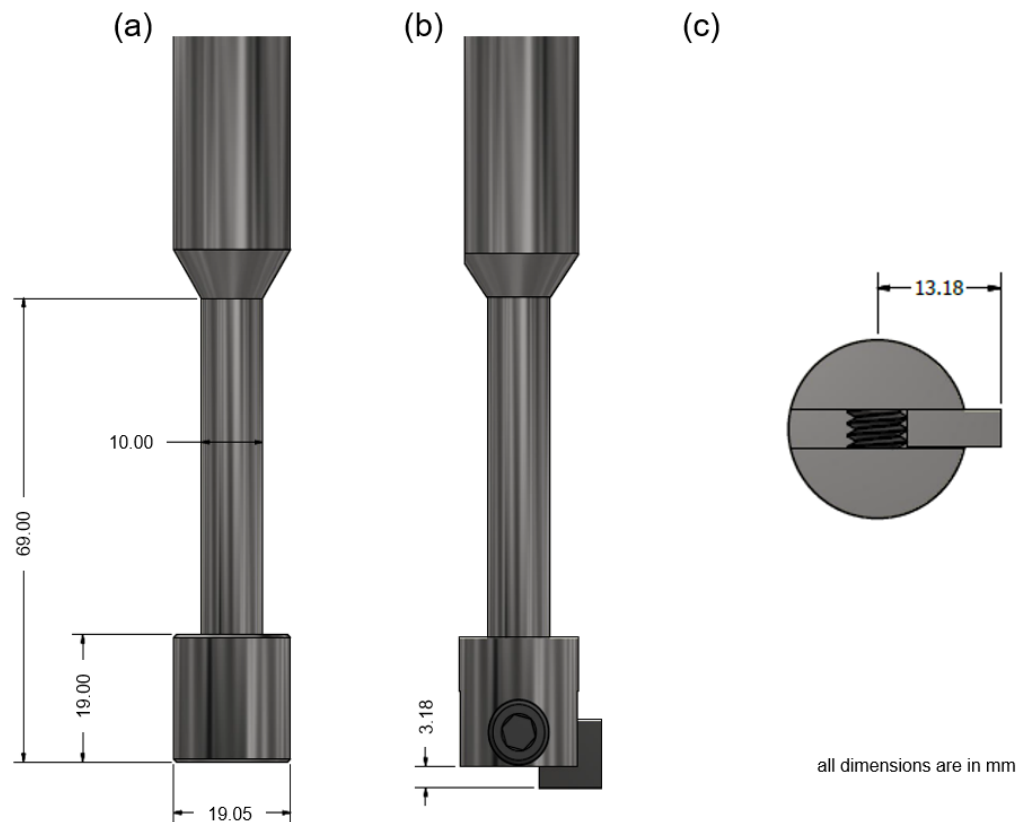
(a) Basic Geometry of Tool Holder (b) Front View and (c) Bottom View of Tool Holder Clamping a Square Insert.
